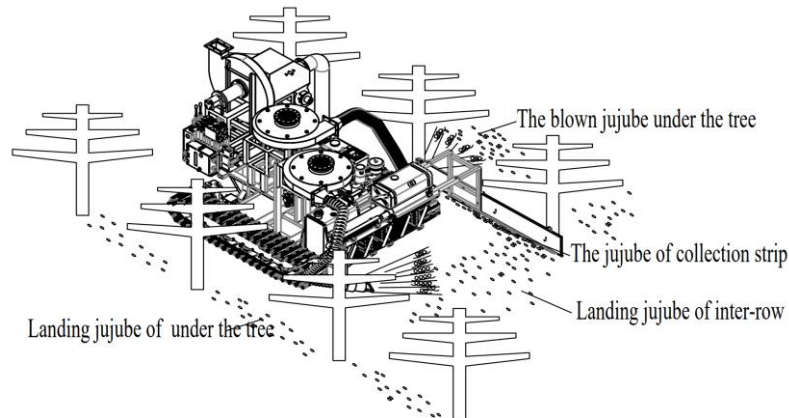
Working principle of the self-propelled jujube collecting strip pick-up machine
